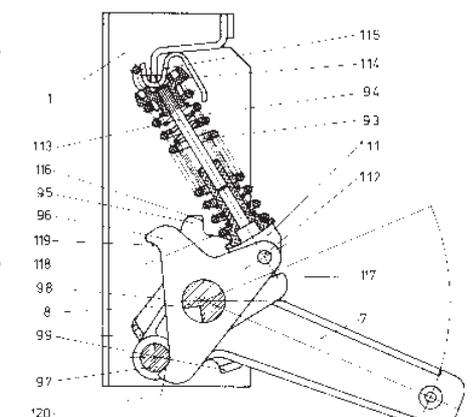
Toggle-spring mechanism for type CK3 switch, 10/12 kV in OFF-position
